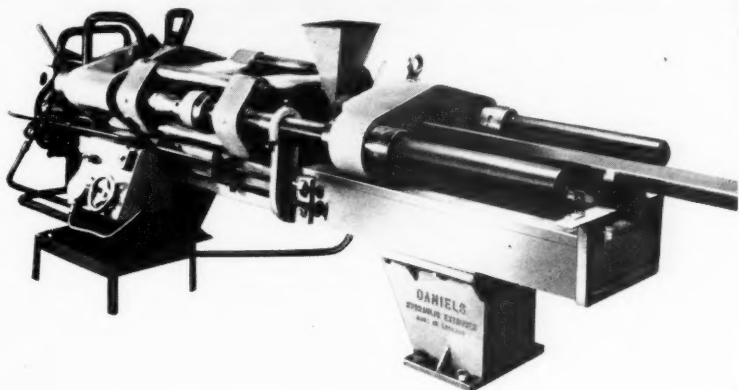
Daniels Extrusion Press with Automatically Reciprocating Hydraulic Ram
